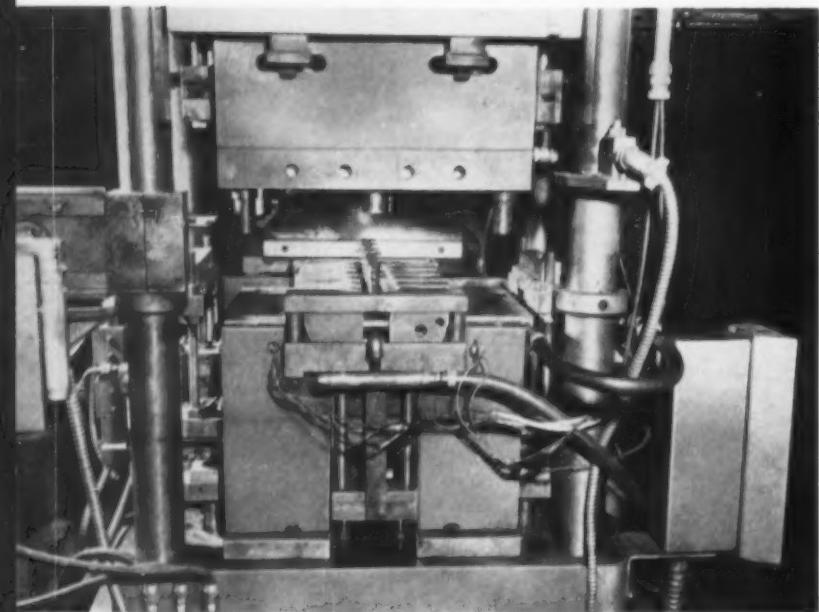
Close-up view of fully opened mold. Coil forms (center of photo) are raised on ejector pins. (All illustrations, Stokes)
